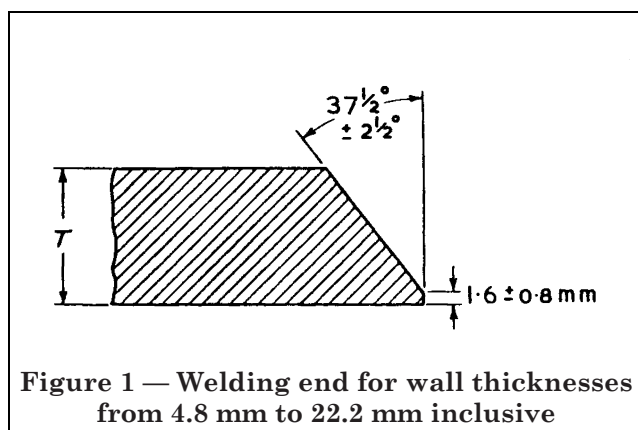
Welding end for wall thicknesses from 4.8 mm to 22.2 mm inclusive
